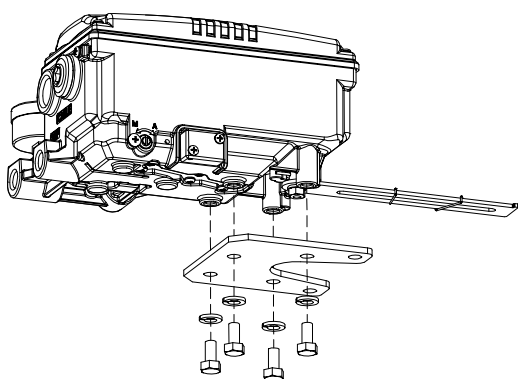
Attaching positioner to bracket (YT-3303L)
